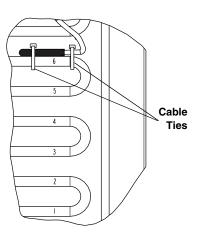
Removing evaporator temp sensor: Cut cable ties
